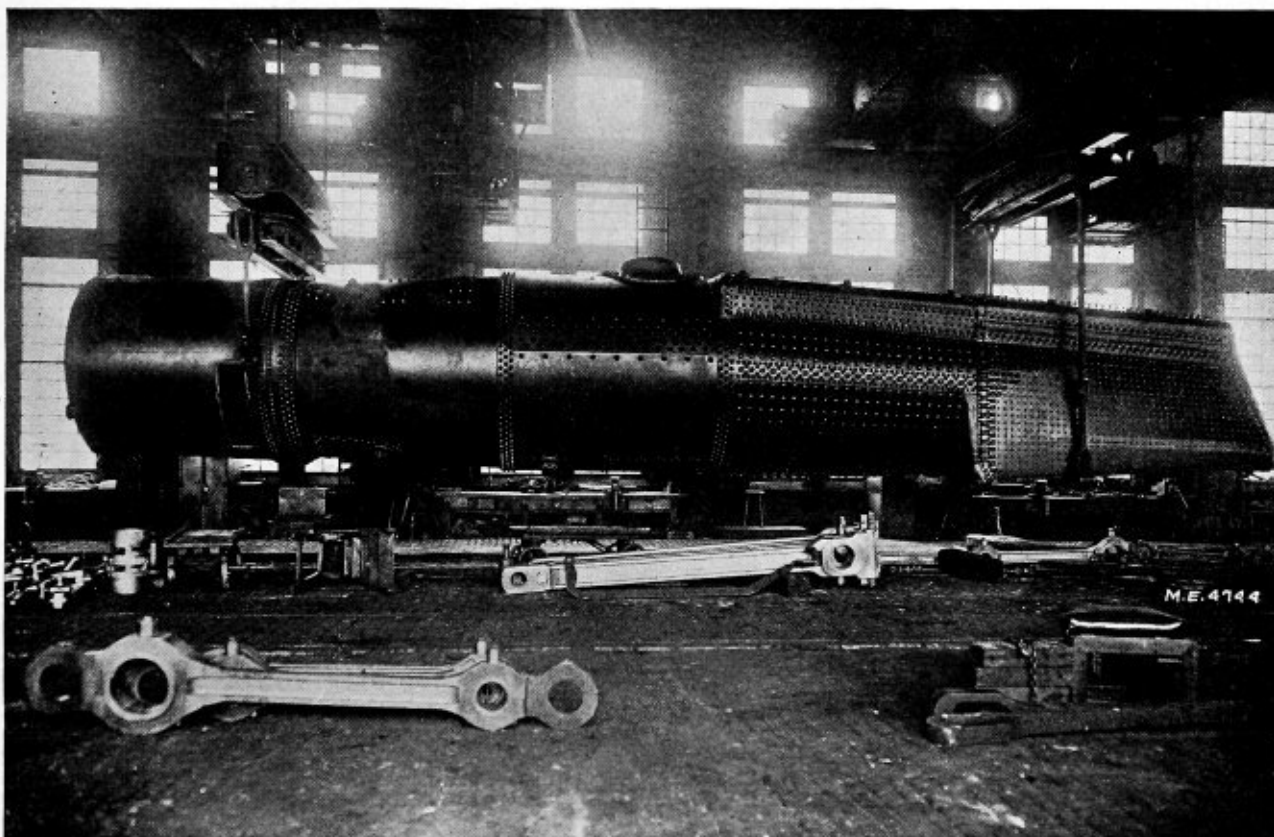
Boiler, Firebox and Combustion Chamber Assembled Ready for Installation
